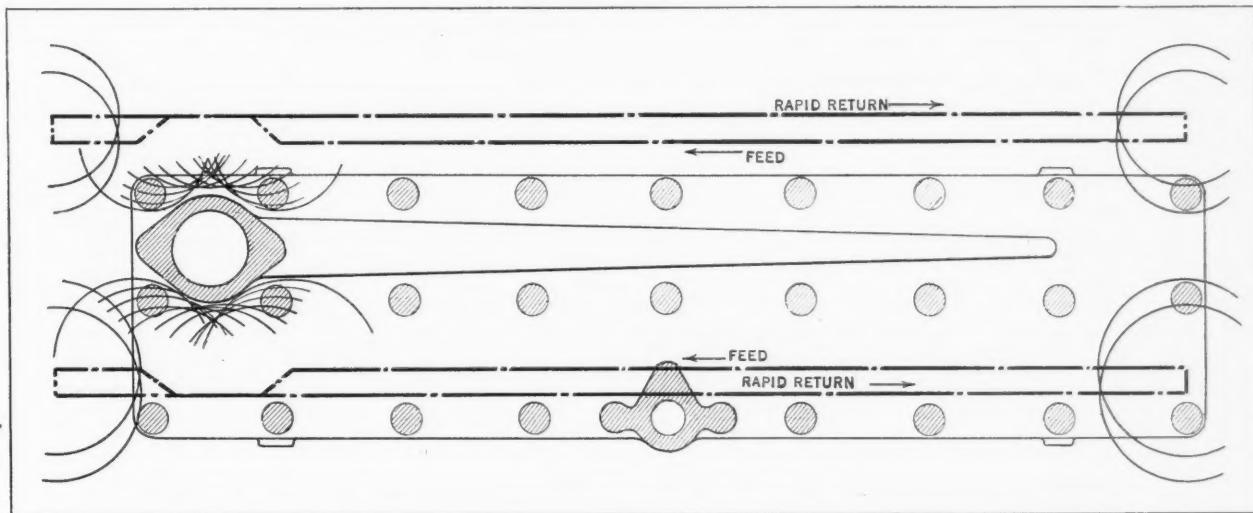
Cylinder Head Milled in Set-up Shown in Fig. 2. Heavy Dot-and-dash Lines Indicate Paths of Cutters
